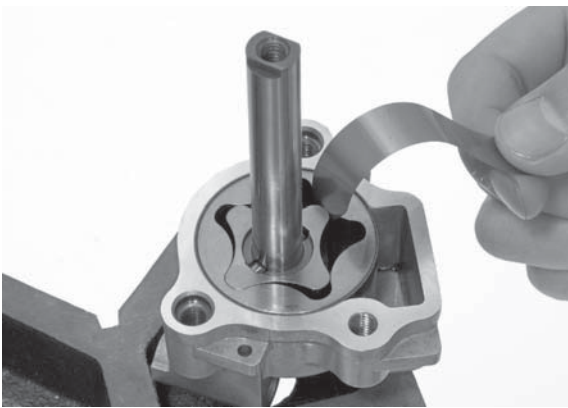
Measuring the tips of a rotor-type oil pump. Copyright by American Honda Motor Co., Inc. and reprinted with permission.
